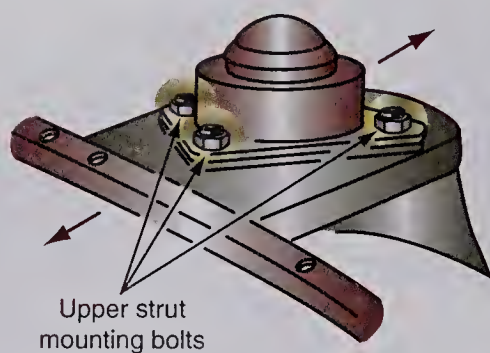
The upper strut mounting bolts can be loosened and the mount moved inward or outward to adjust camber on some MacPherson strut front suspension systems.
